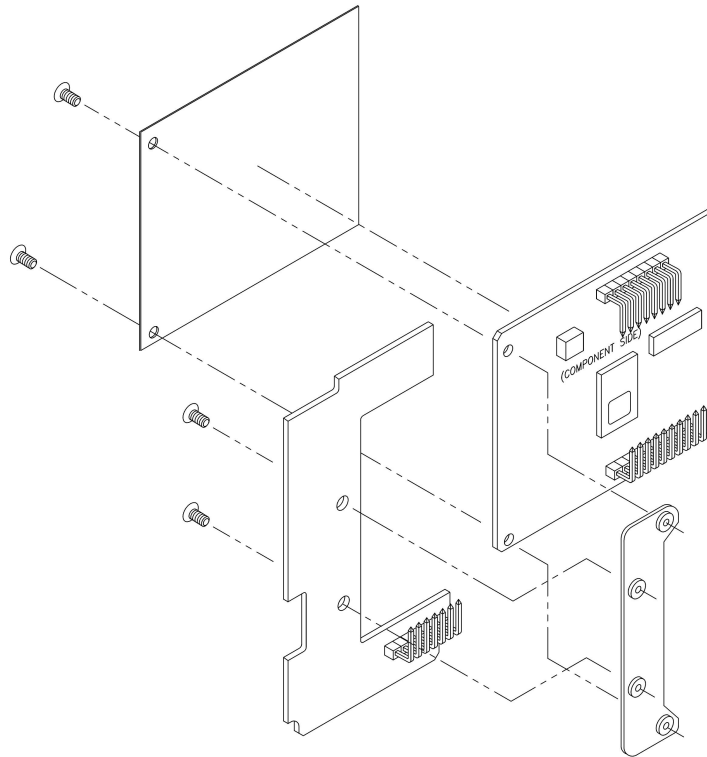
SureTemp Board & Mounting Support Exploded View (675 OEM)
